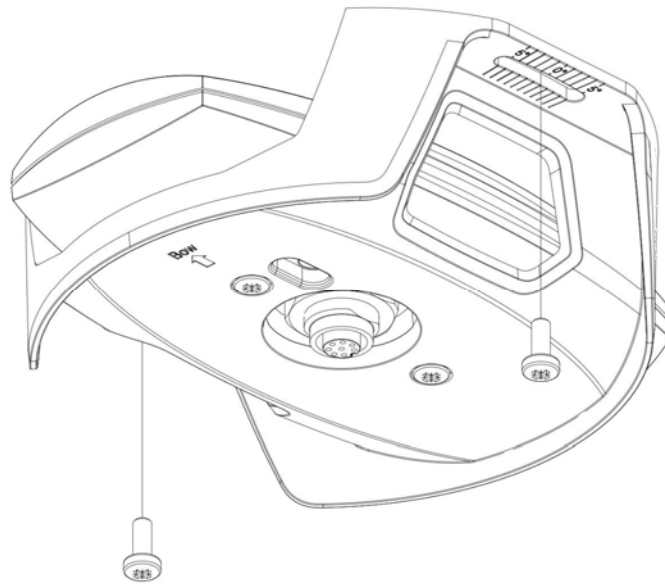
ROOF MOUNT INSTALLATION STEP 7 (FINAL CLAMPING OF THE TWO SELF-CUTTING STAINLESS SCREWS)
